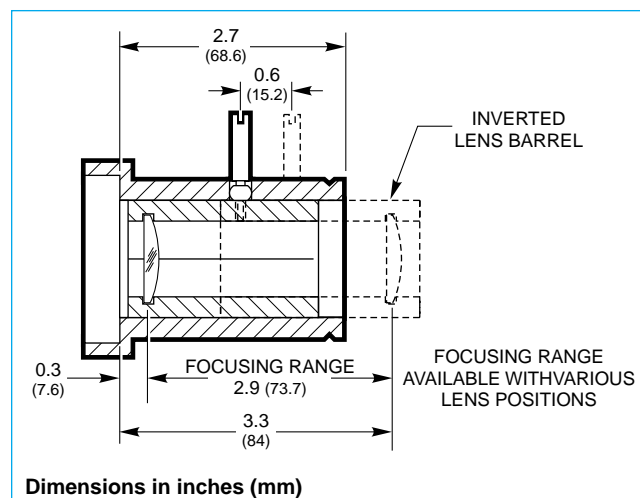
Dimensional diagram of 77330 Focusing Lens Assembly.
